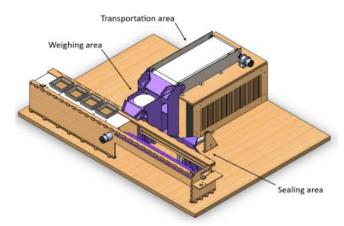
CAD prototype of transport and packaging bakery products machine.
